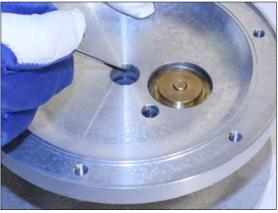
On TX70 up to TX820: If the shaft sealings (36) seem to be worn out (by internal leakage of air), carefully remove them together with the backup o-rings (47) with a pointed tool. During this operation, the sealing and backup o-ring usually get destroyed, so make sure to have replacement spares on stock.
